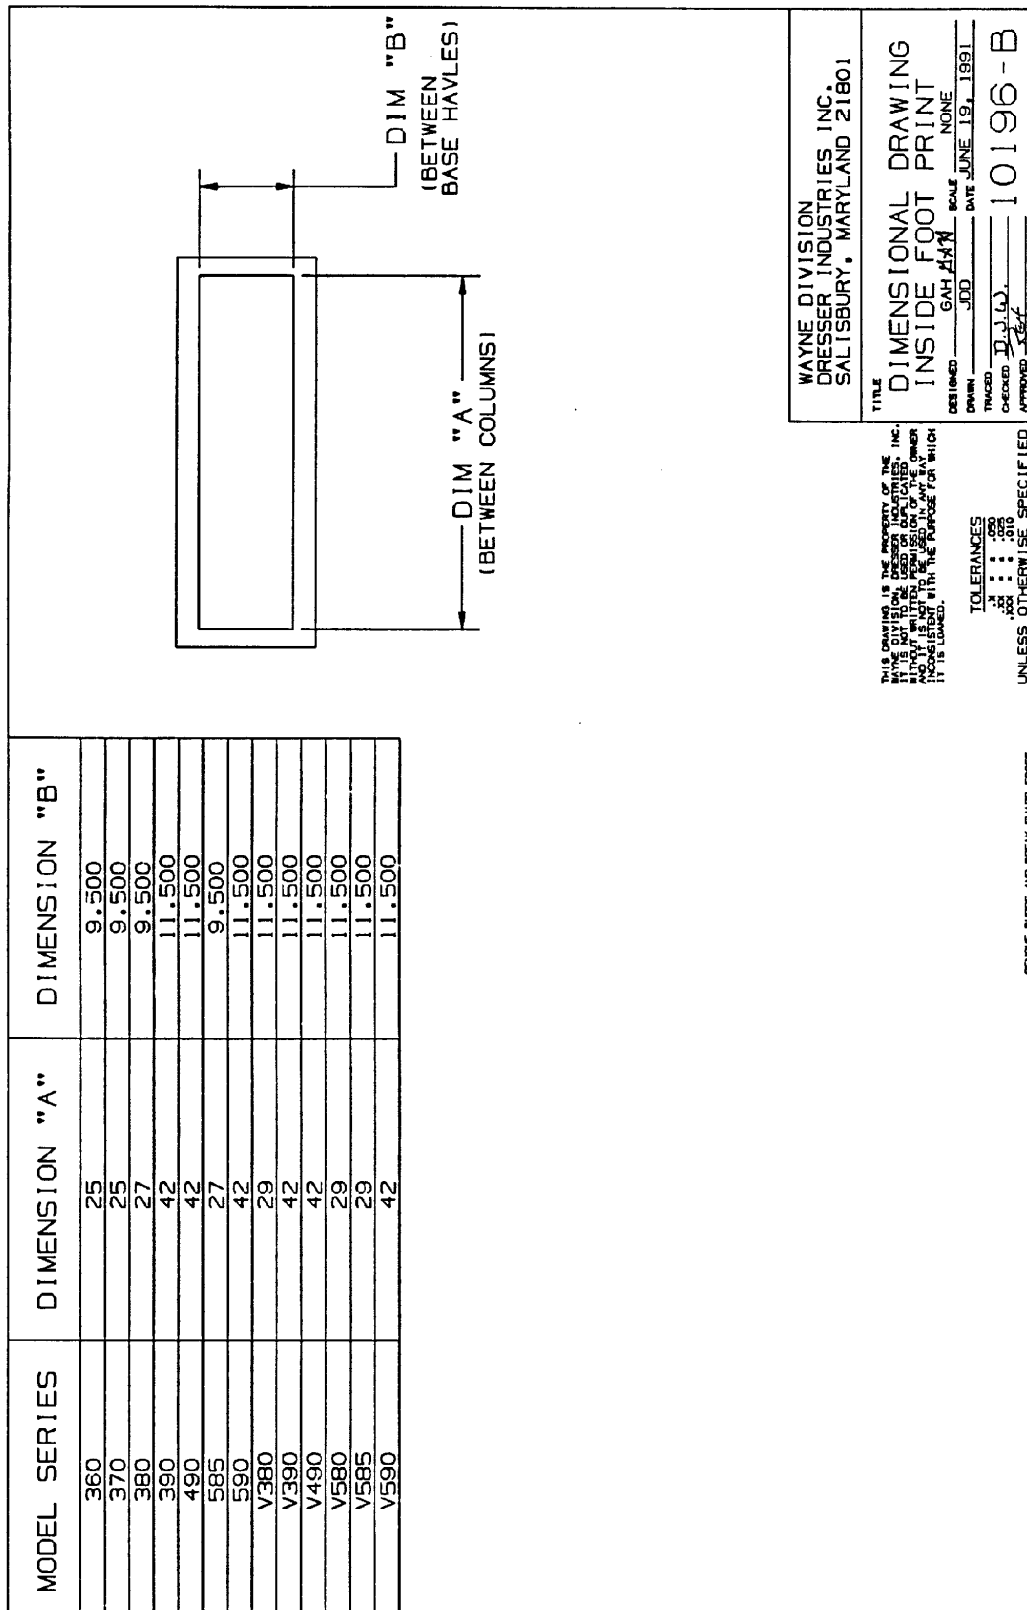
10196-B DIMENSIONAL DRAWING - INSIDE FOOTPRINT.
